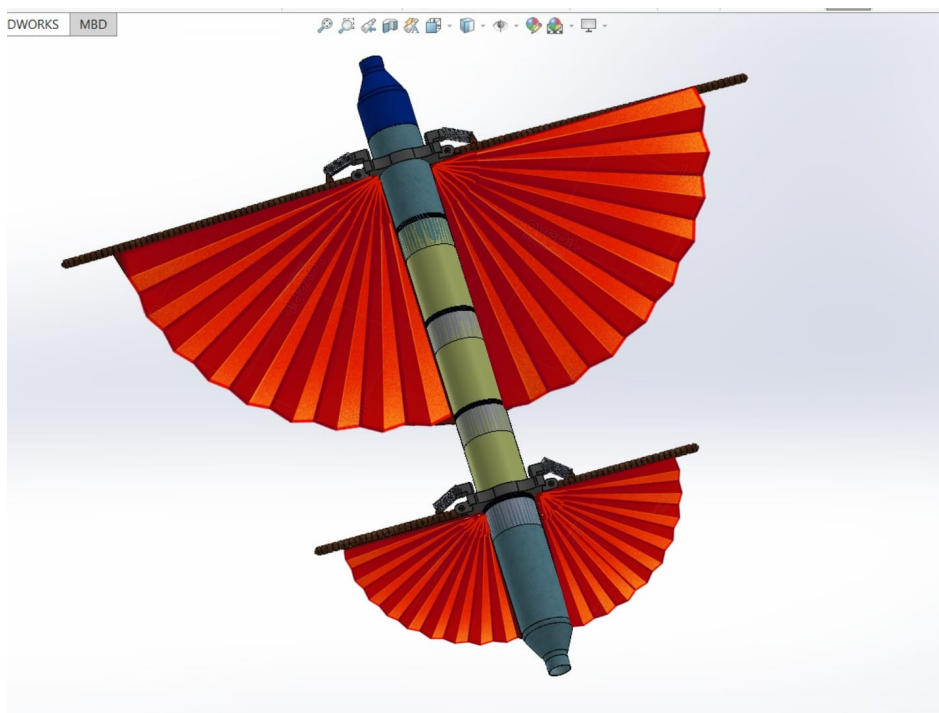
CAD: Rocket with retractable wings in a hand-fan-like shape
